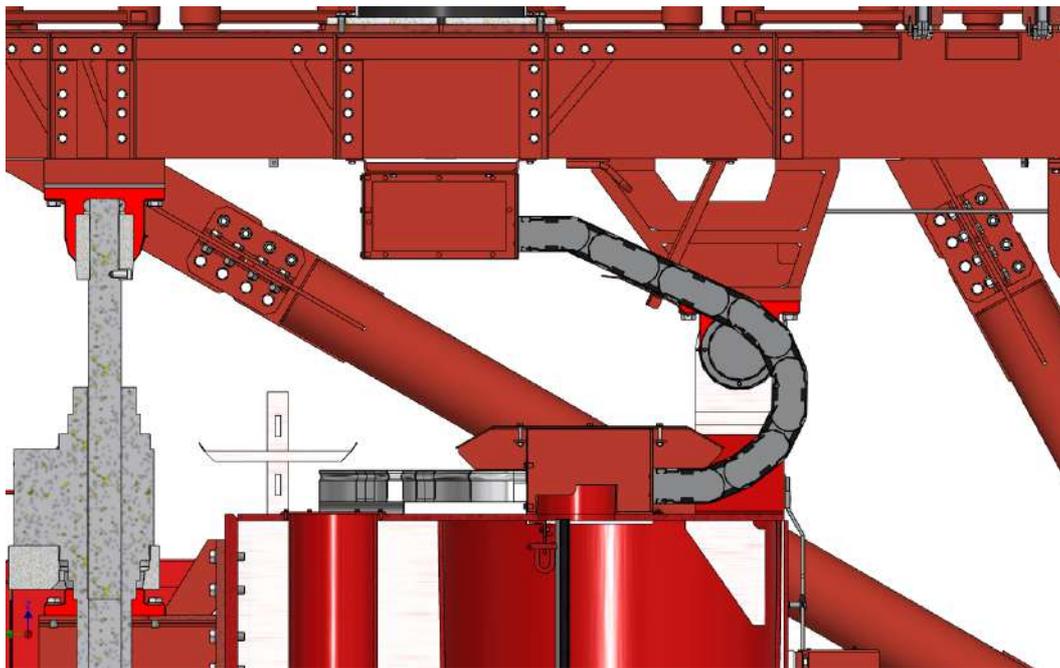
Side view of back of M2, showing the Elevation cable Chain.
